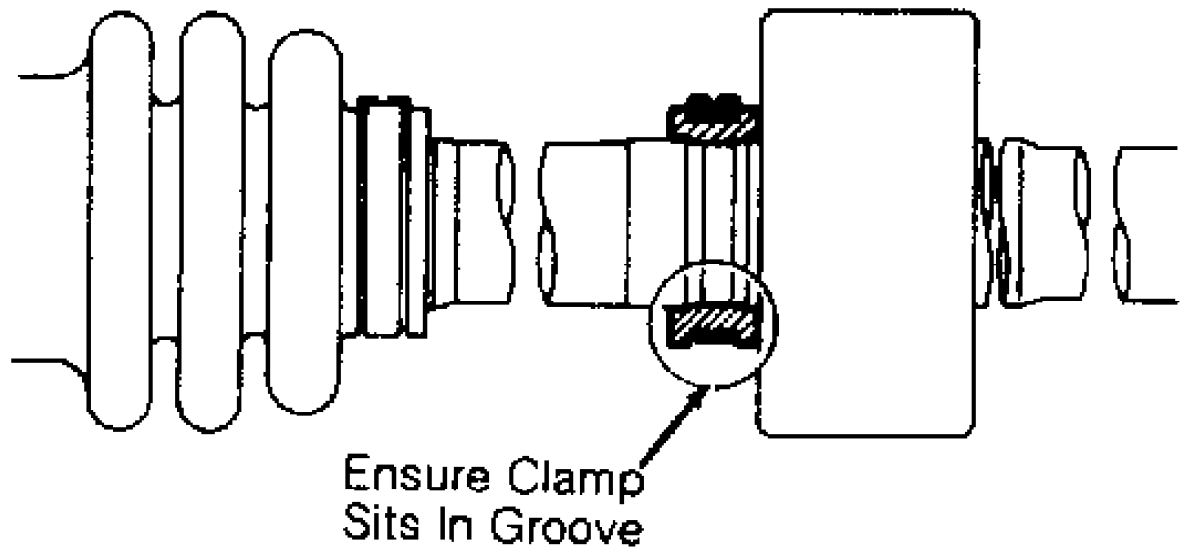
Locating Damper on Corolla FX (4A-GE Engine)
